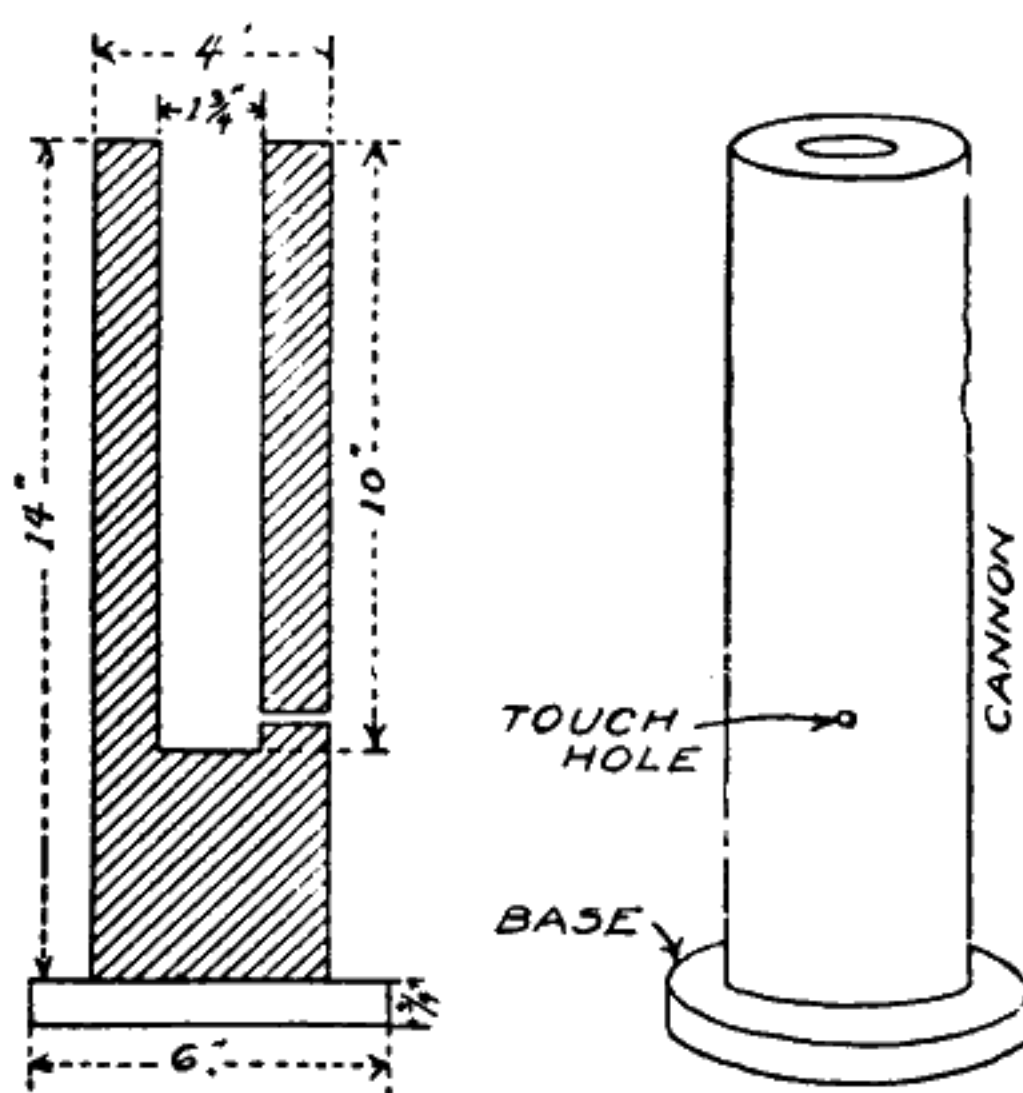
Details of a stack gun or cannon. This is loaded with blasting powder placed in the bottom of the stack and fired.
